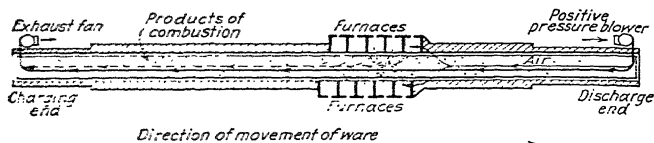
A plan section of a direct-fired tunnel kiln. (American Refractories Institute.)
